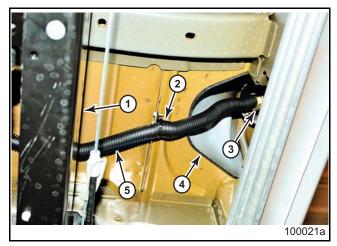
Fuel Fill Line, Bracket and Edge Clip (E-Series Shown)
